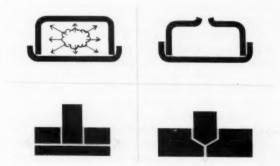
Parts to be joined should not have large mating radii or be positioned by double shoulders. Locate with a single shoulder and employ a small radius matched with a chamfer.
